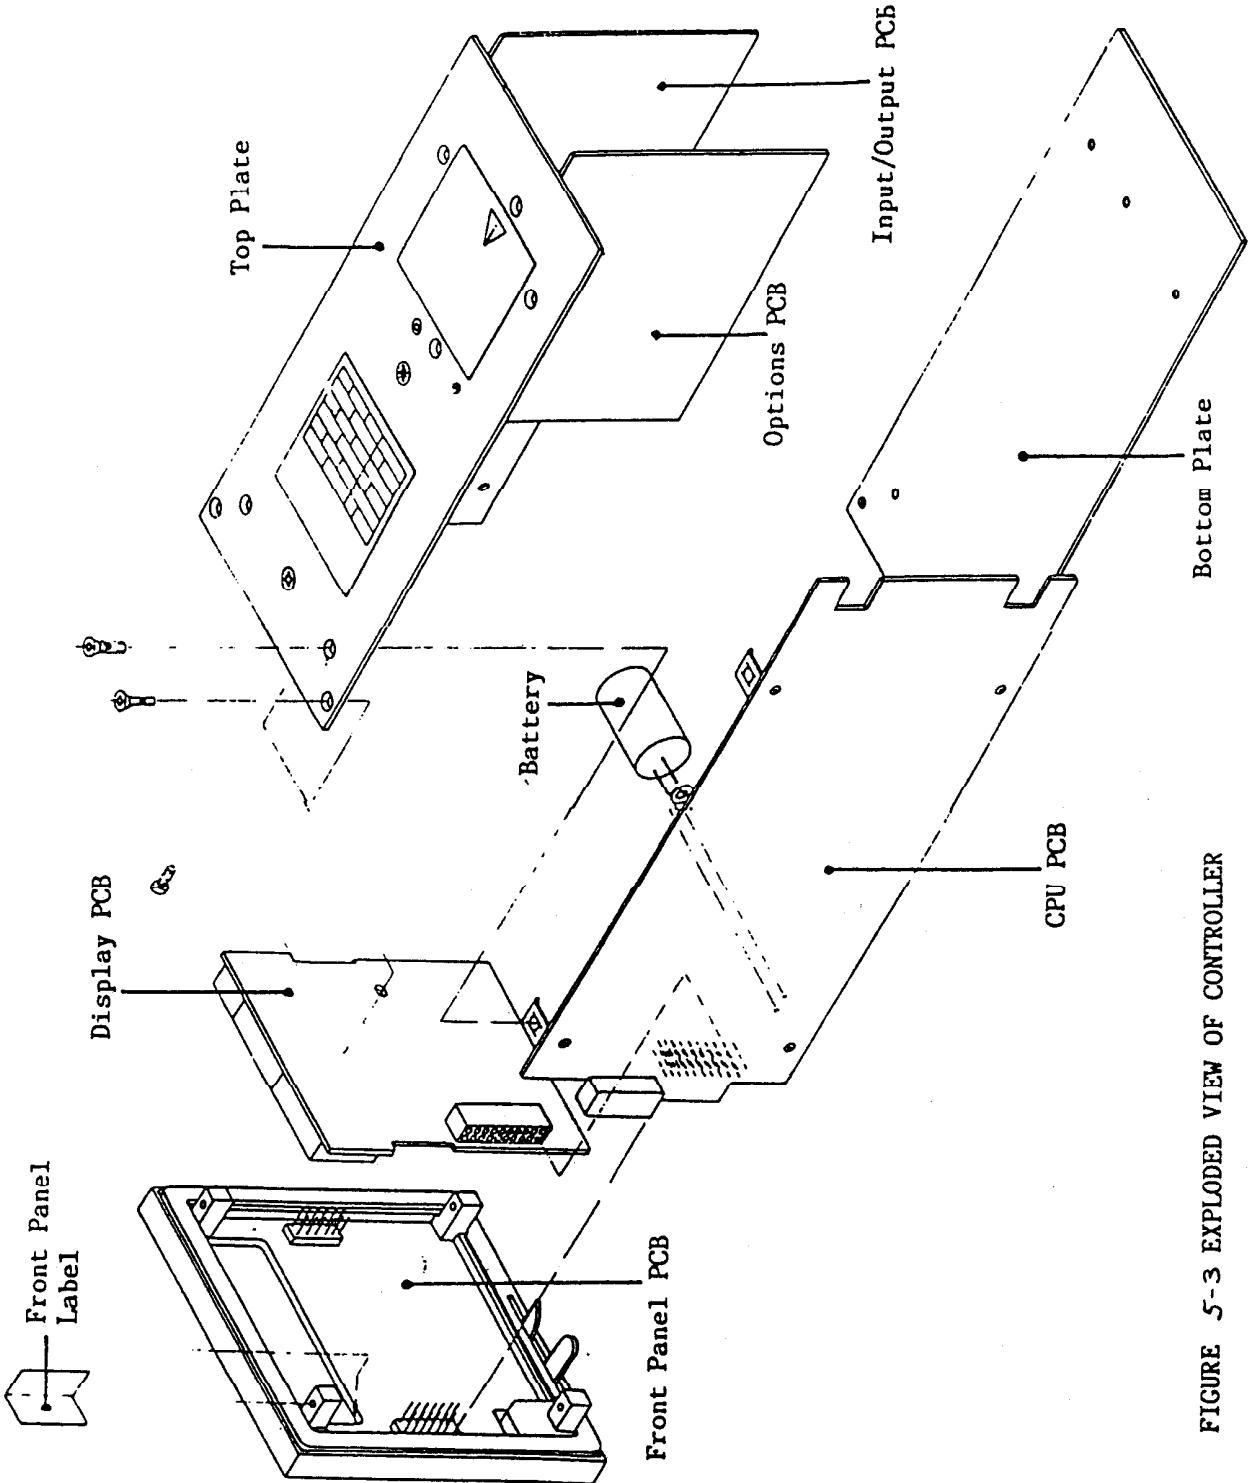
EXPLODED VIEW OF CONTROLLER
